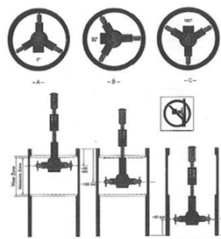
Bore Gauge Measurement Positions within the Mold Bore
